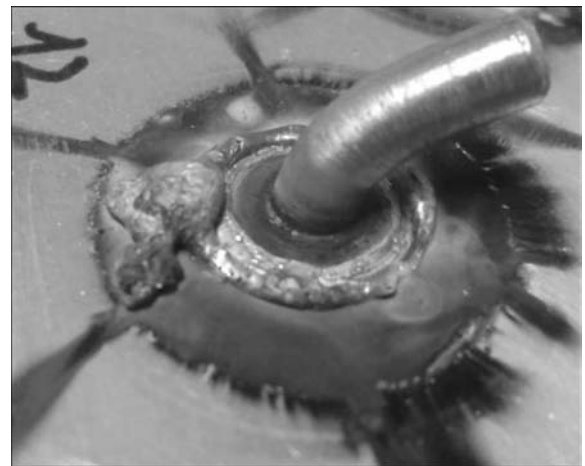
Joining of steel stud of 6 mm diameter to aluminum sheet of 3 mm thickness after impact bending testing on ISO 14555
